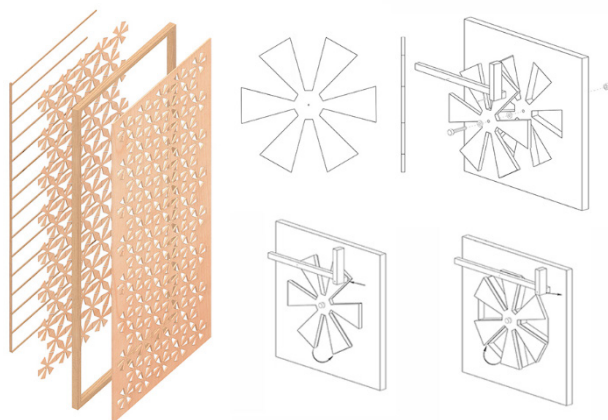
The Shutter prototype: exploded view of a single module and kinematic mechanism of each mobile dodecagon. [6]
